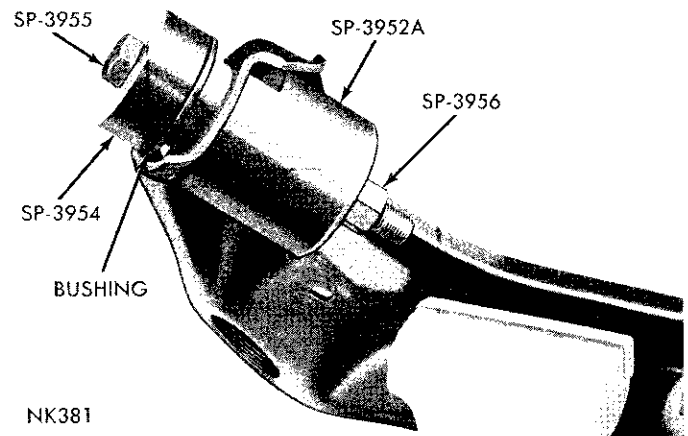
Installing Upper Control Arm Bushing (Chrysler)
